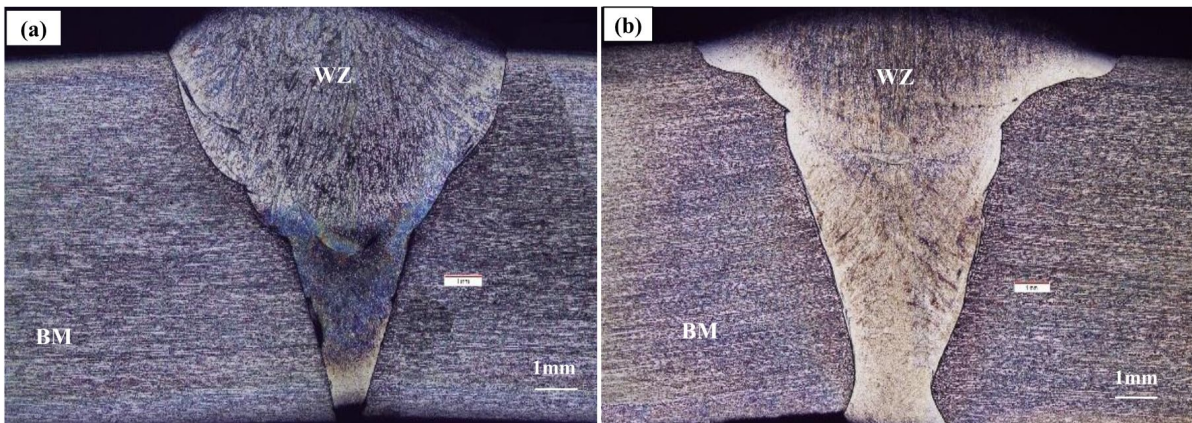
Optical micrographs of weldments (a) GTAW weld (b) SMAW weld
